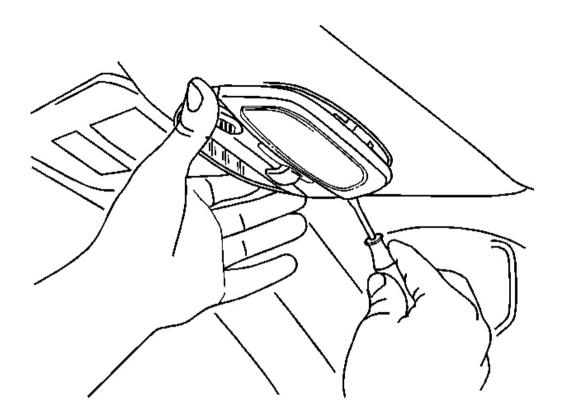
View Of Reading Lamp Bulb Courtesy of GENERAL MOTORS CORP.
